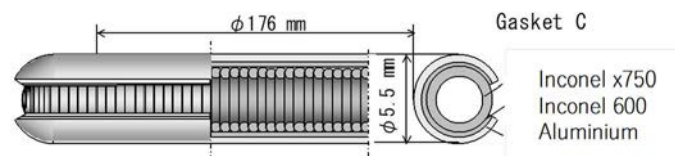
Example of a metal seal with aluminium coating (reproduced from Ref. [25] permission courtesy of EPRI) .
